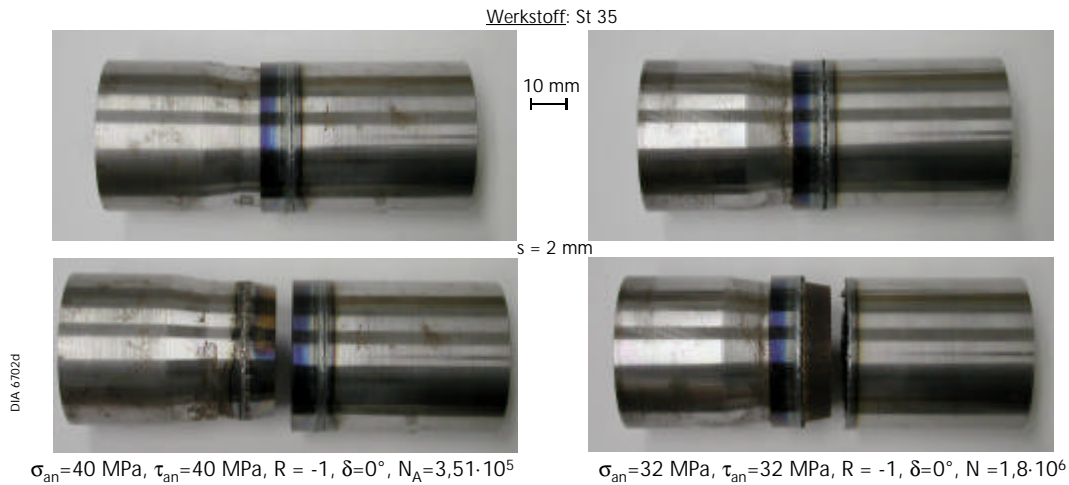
Failure modes of laser beam welded tube-tube specimens
